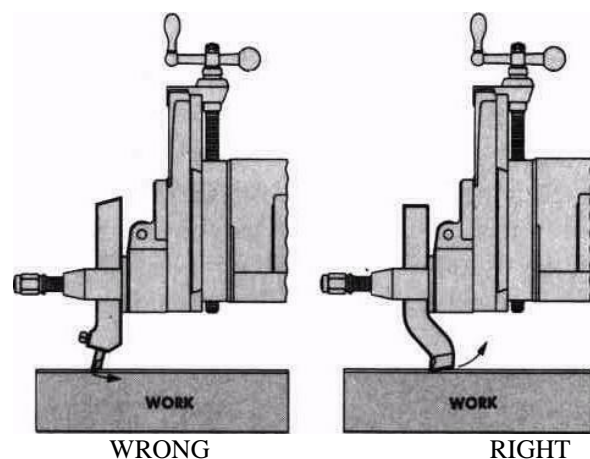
The tool's position and the angle at which the tool is held affect its cutting action.
